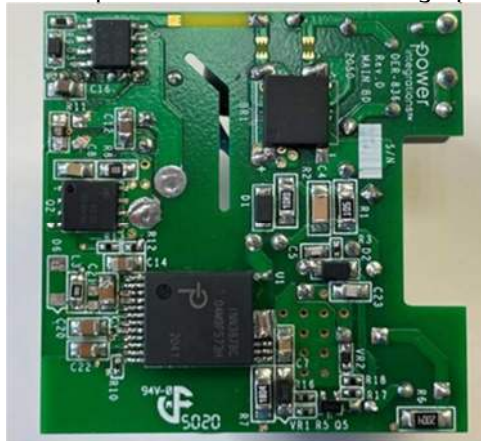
Populated Circuit Board Photograph – Bottom (L: 44 mm x W 44 mm).
